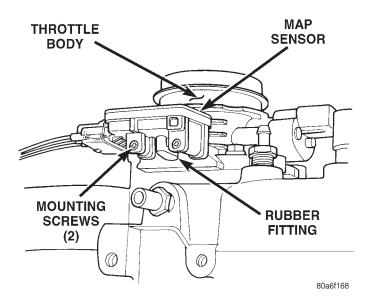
Rubber L-Shaped Fitting—MAPSensor-to-Throttle Body—4.0L Engine
